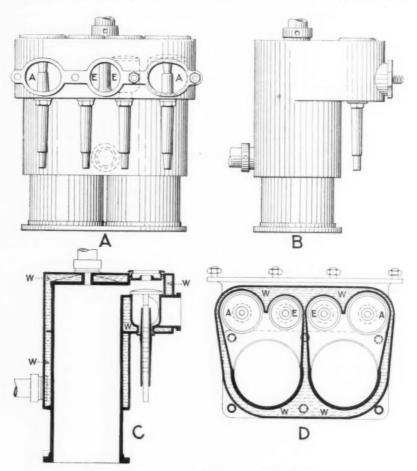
Autogenously Welded Gas Engine Cylinders
